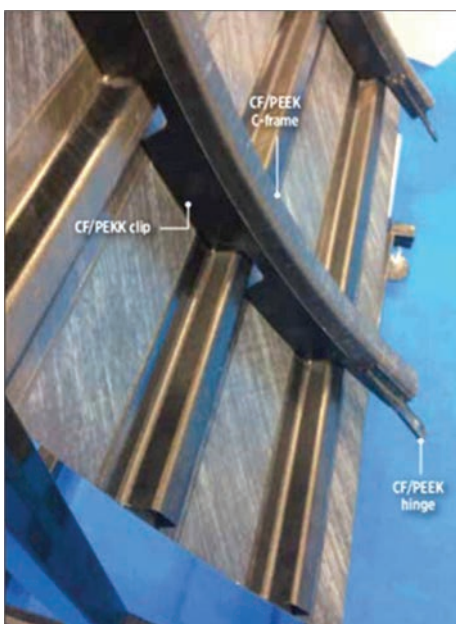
Sequential ultrasonic spot welding of elements made of TPC carbon fiber/PEEK
